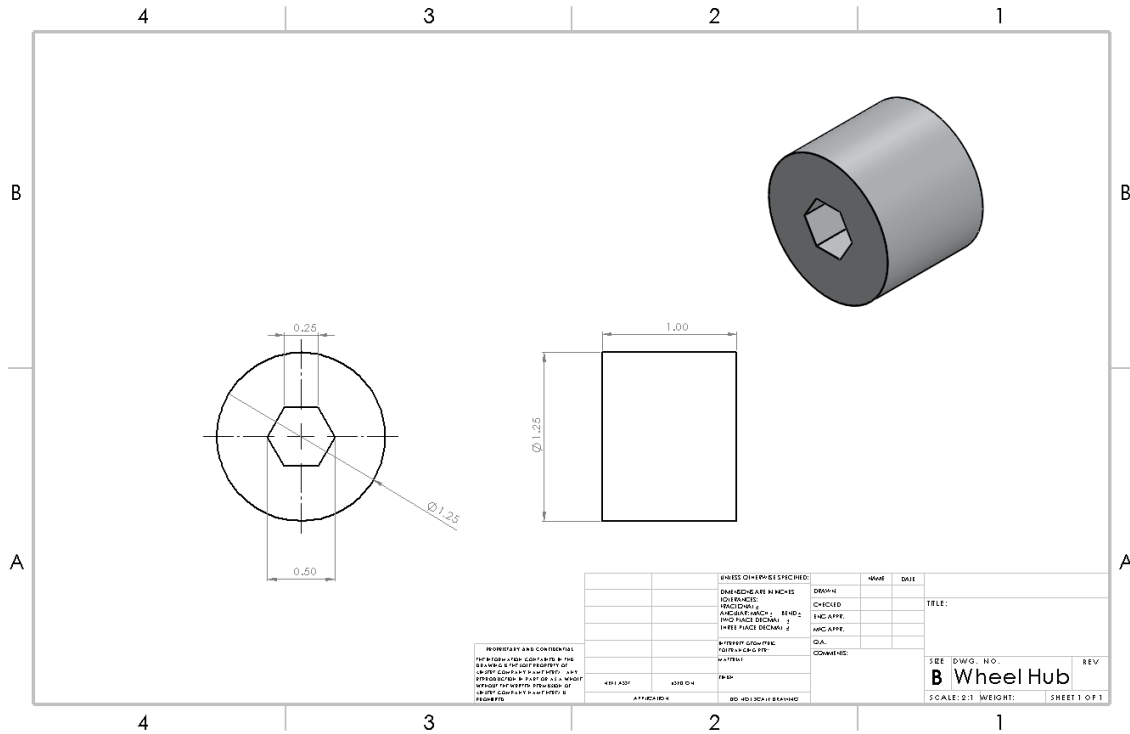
The sketch and dimensions of the wheel hub.
